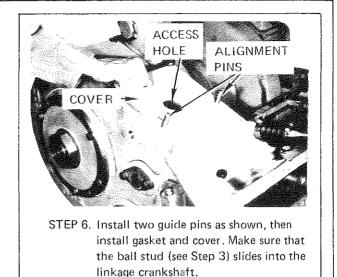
INSTALLATION OF INTERMEDIATE SHAFT ASSEMBLY FOR WINCH WITH FREE SPOOLING (Sheet 2 of 2)
